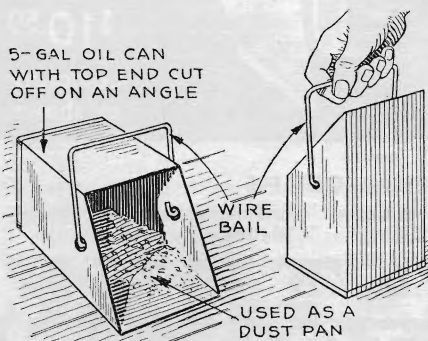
Cutting away the top half of old oil can and fitting on handle makes a dustpan
